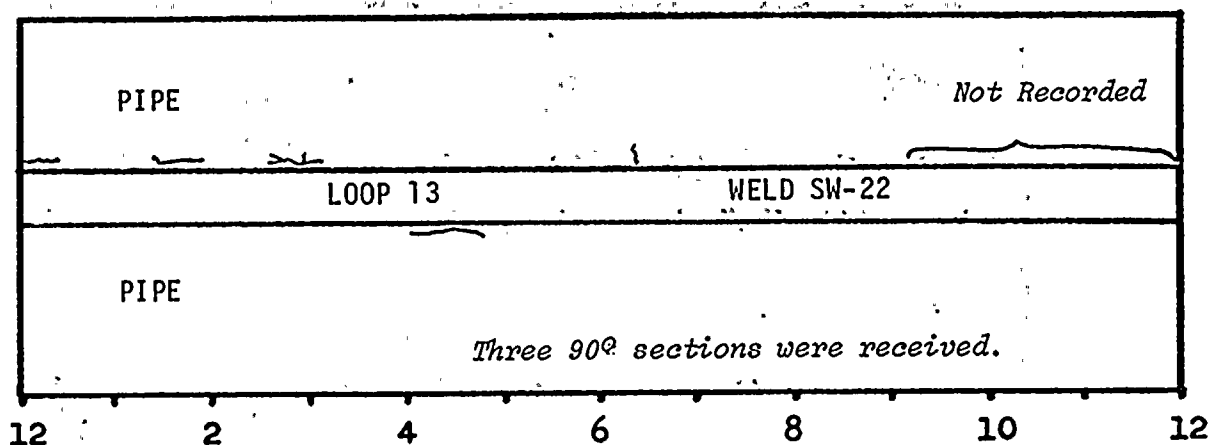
(Continued) Dye Penetrant inspection results, Loop 13 welds. (See Figure 3 for weld locations.)
